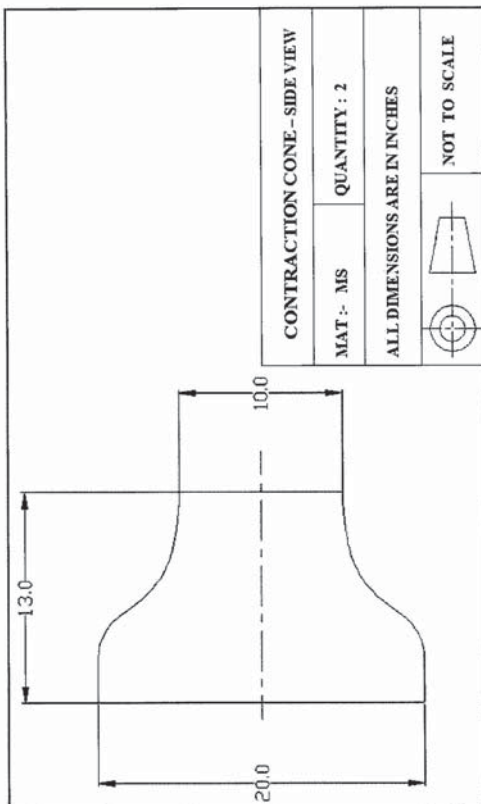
CAD DRAWING OF CONTRACTION CONE – SIDE VIEW
